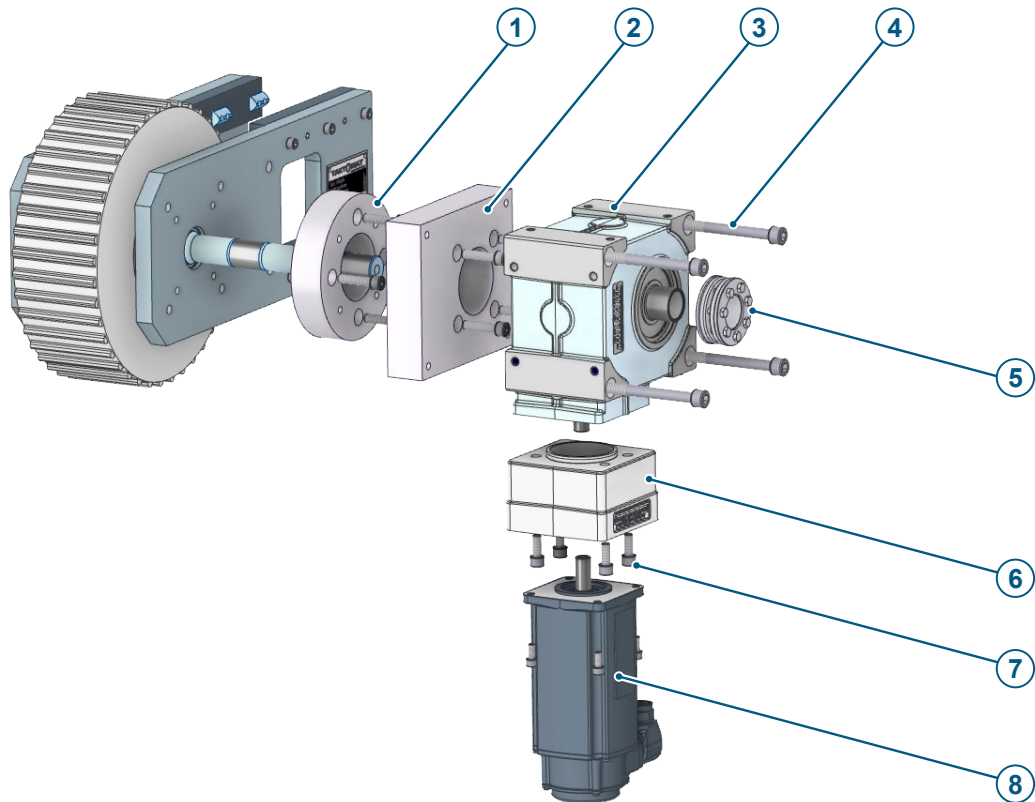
Attachment sequence for the drive (Atlanta worm gear and servo motor)
